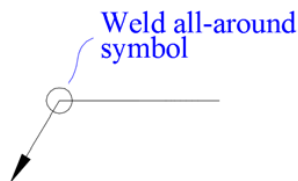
Weld All-Around Symbol—AWS A2.4
